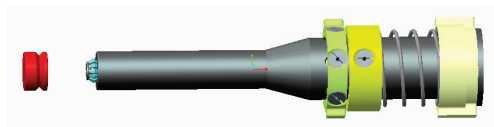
Drawing of the pug holder that will fit into the back wall of the gun cavity. The small CuBe spring that holds the plug is locked tightly and can be opened by a mechanism inside the holder rod.
